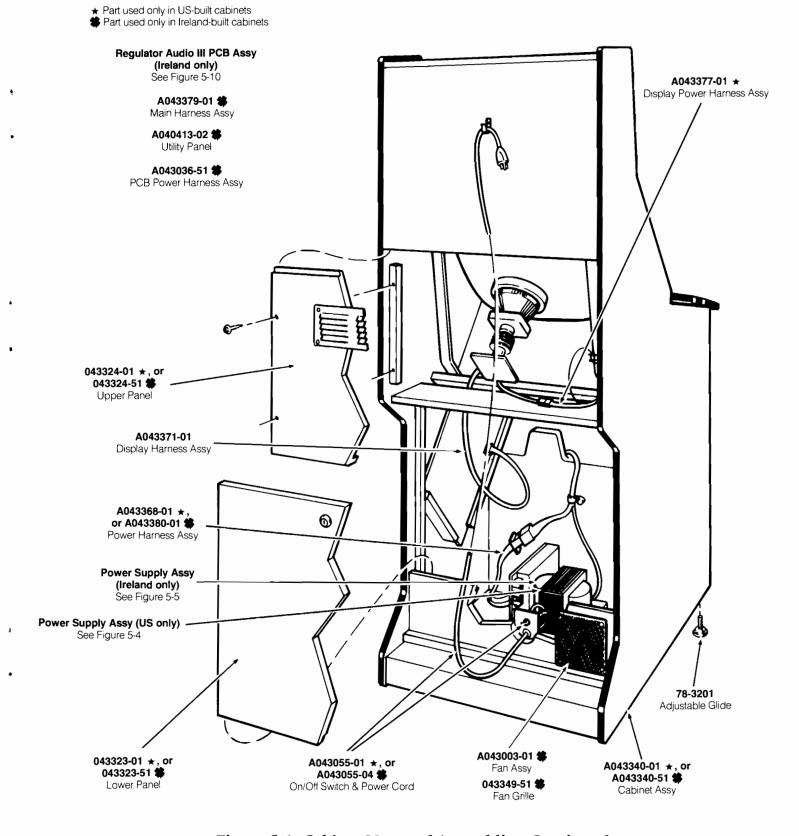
Cabinet-Mounted Assemblies, Continued
